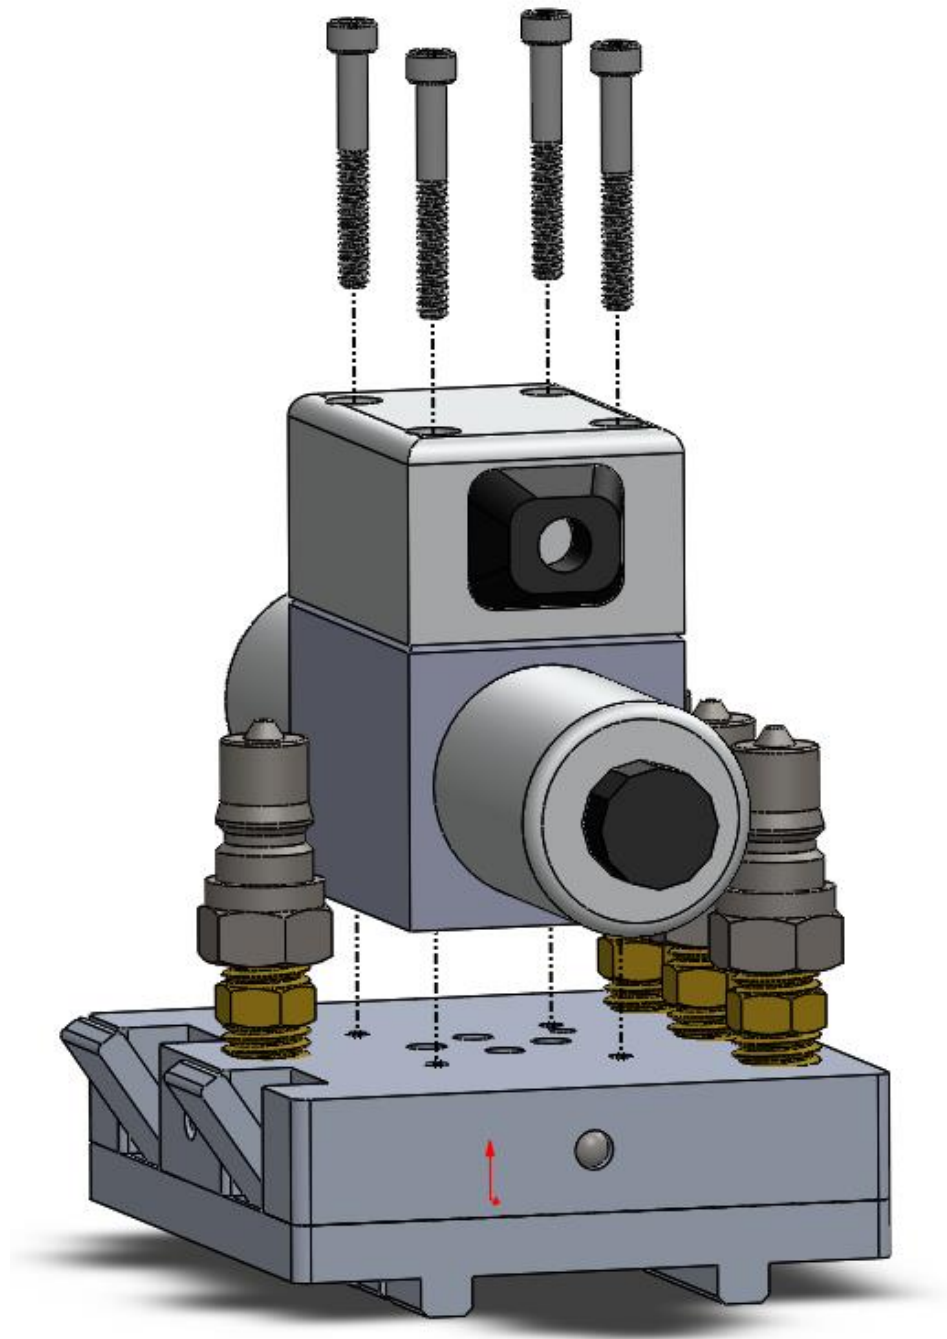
shows how a hydraulic valve is placed on the sub- and mounting plate assembly.
